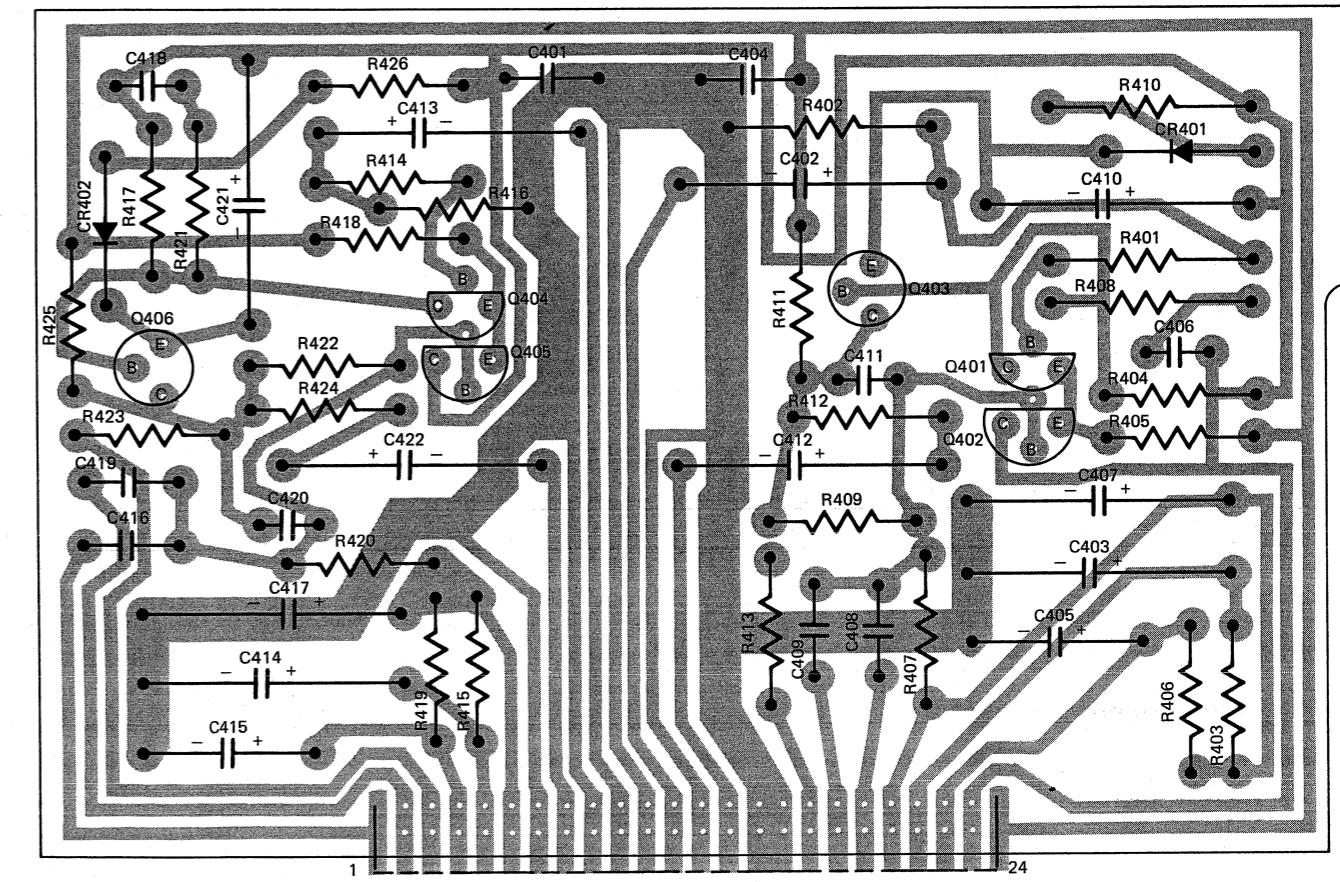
X10 Amplifier Board – A3 Component Assembly Diagram
